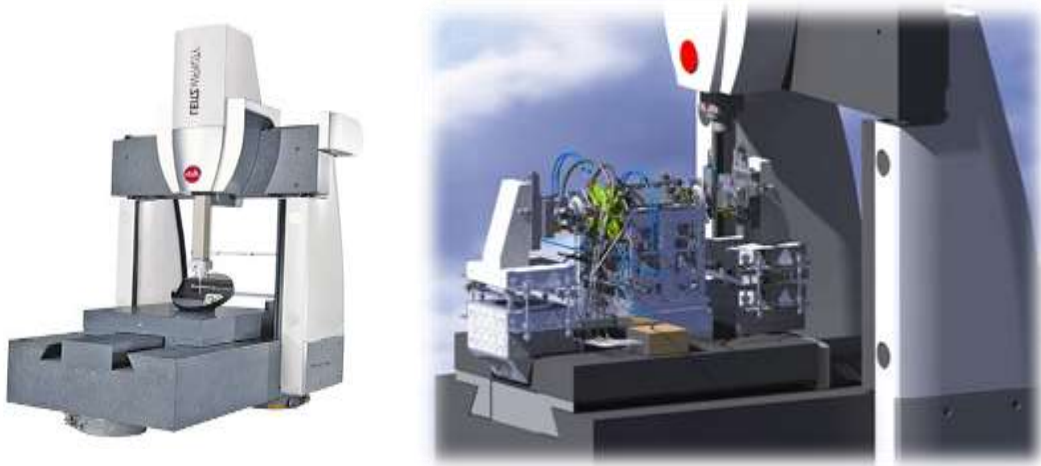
Left CMM (Leitz Infinity). Right CAD impression of the integrated pre-alignment system with the magnet assembly
